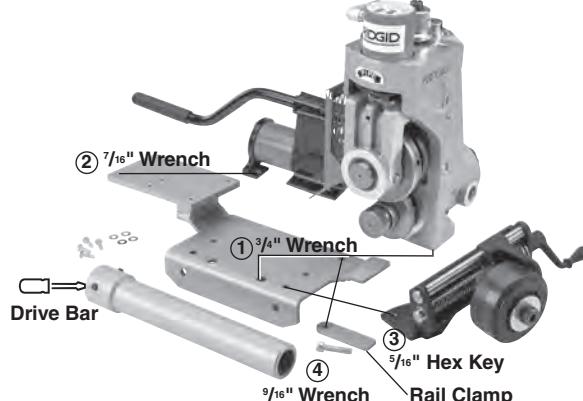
Assembling 918 to 300 Compact/1233 Base
